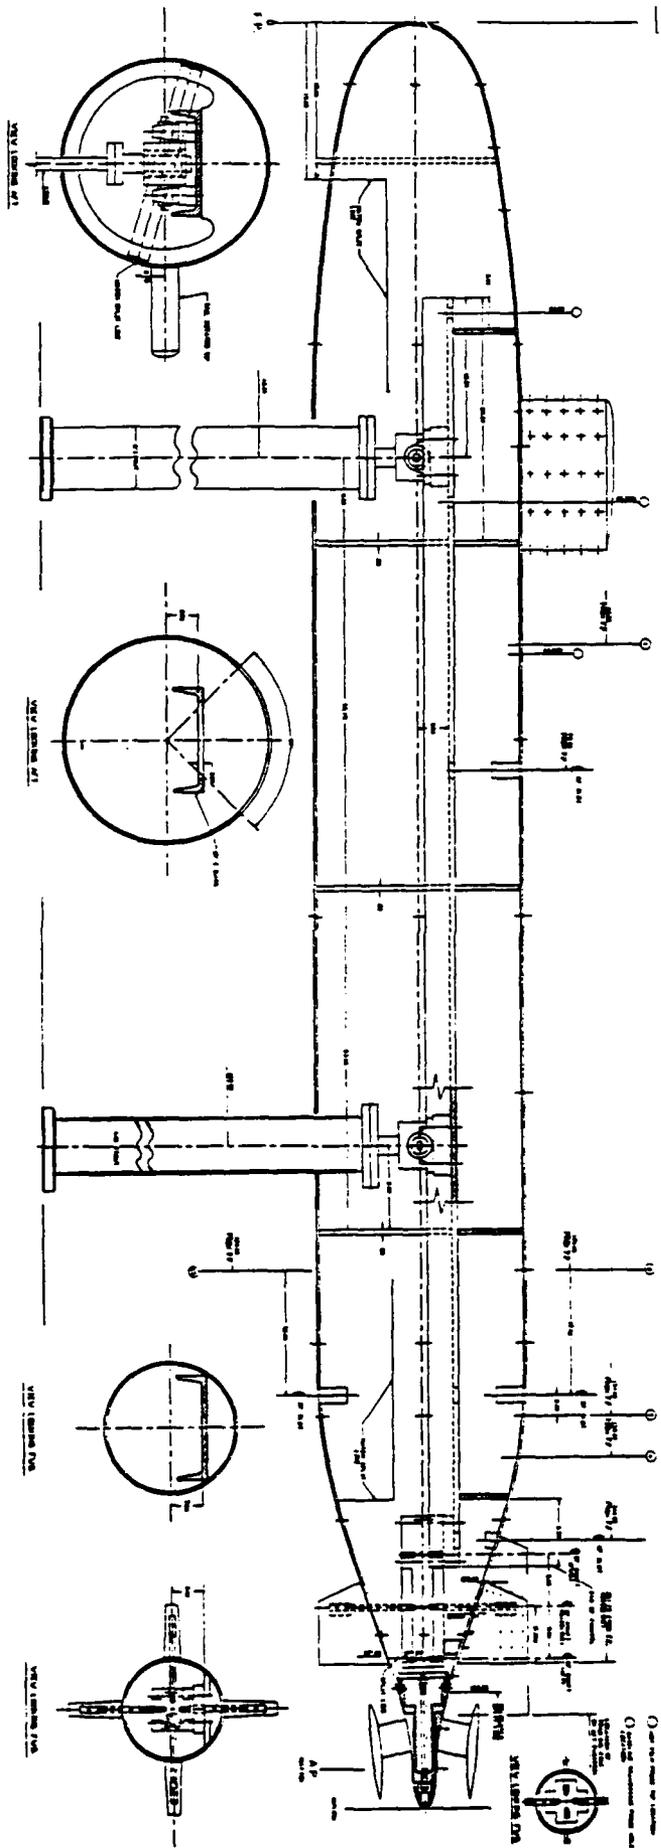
Assembly drawing of DARPA SUBOFF model (DTRC Model No. 5471)
